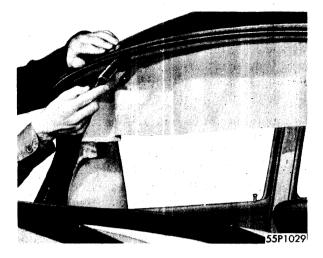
Applying Cement to Rear Window Opening (Typical View)
